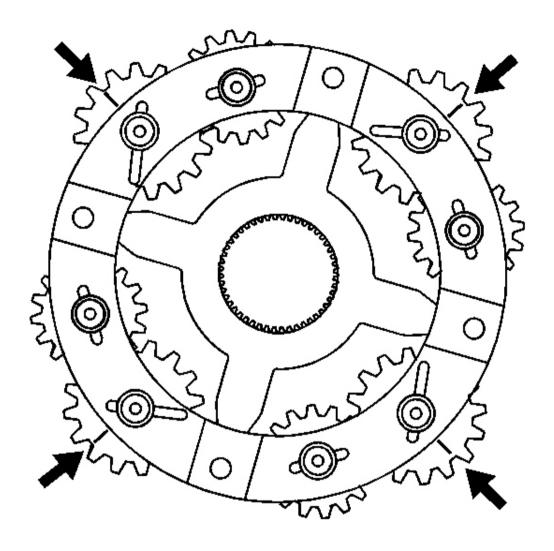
Aligning Marks On Pinion Gears Courtesy of GENERAL MOTORS CORP.
